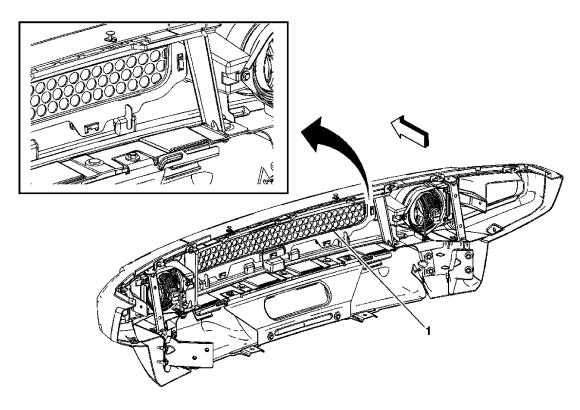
View Of Front Bumper Lower Fascia Grille Courtesy of GENERAL MOTORS CORP.
